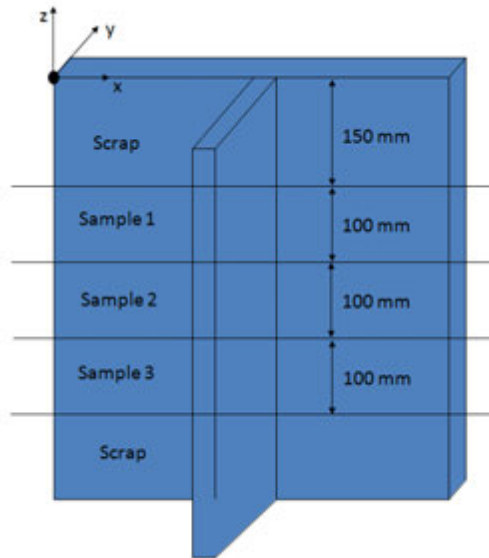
Sketch of the sectioning to make the fatigue specimens.
